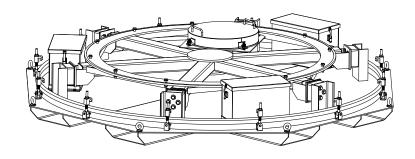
AGSE-C026-G01 Fan and Booster Container Assembly
